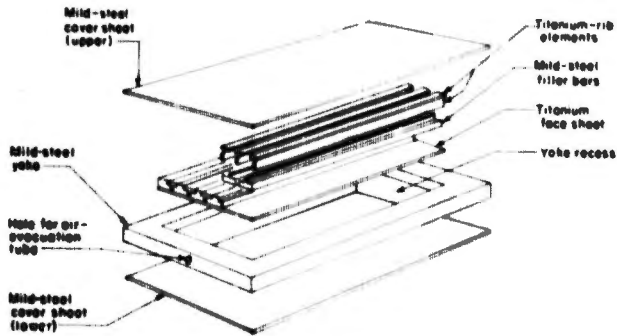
EXPLODED PACK ASSEMBLY FOR ROLL-DIFFUSION-BONDED-STRUCTURE STIFFENED PANEL⁽¹⁾
